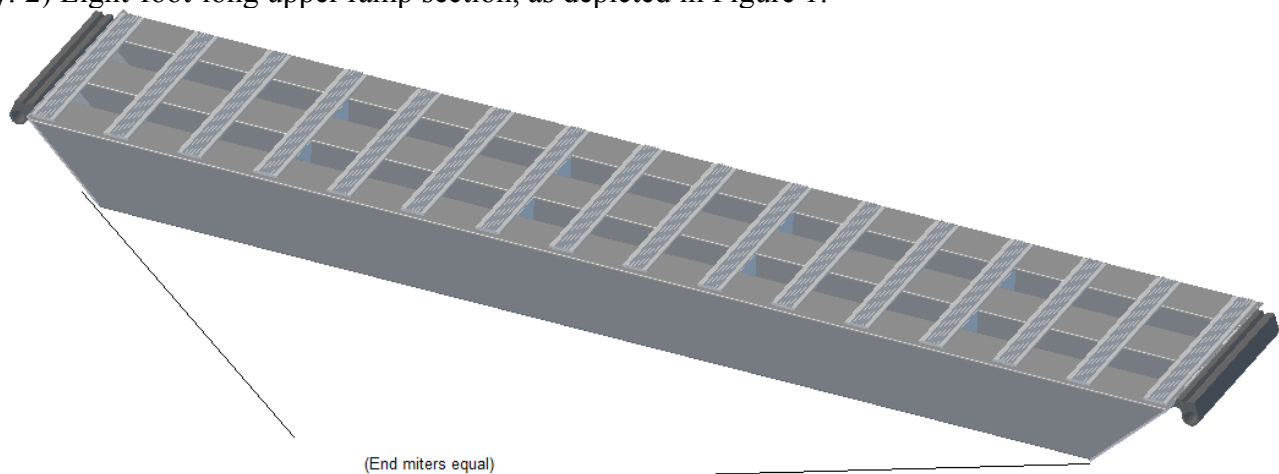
Illustrated view of a Single 8 ft Upper Ramp Section
